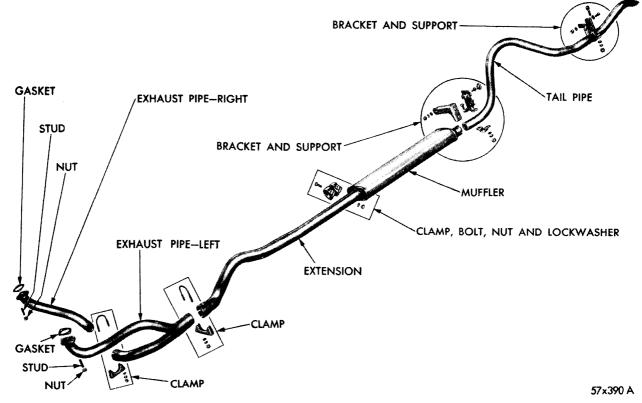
Exhaust System (Single Rocker Shaft Engine Model LC-1)
